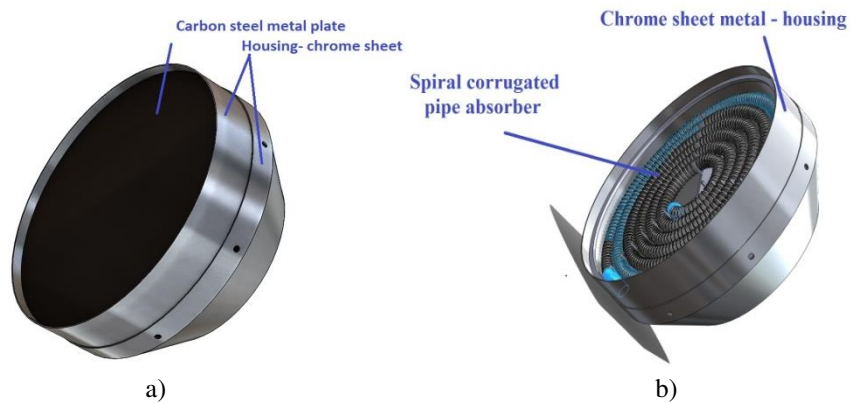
Two types of solar thermal receivers: a) flat plate painted black; b) spiral pipe
